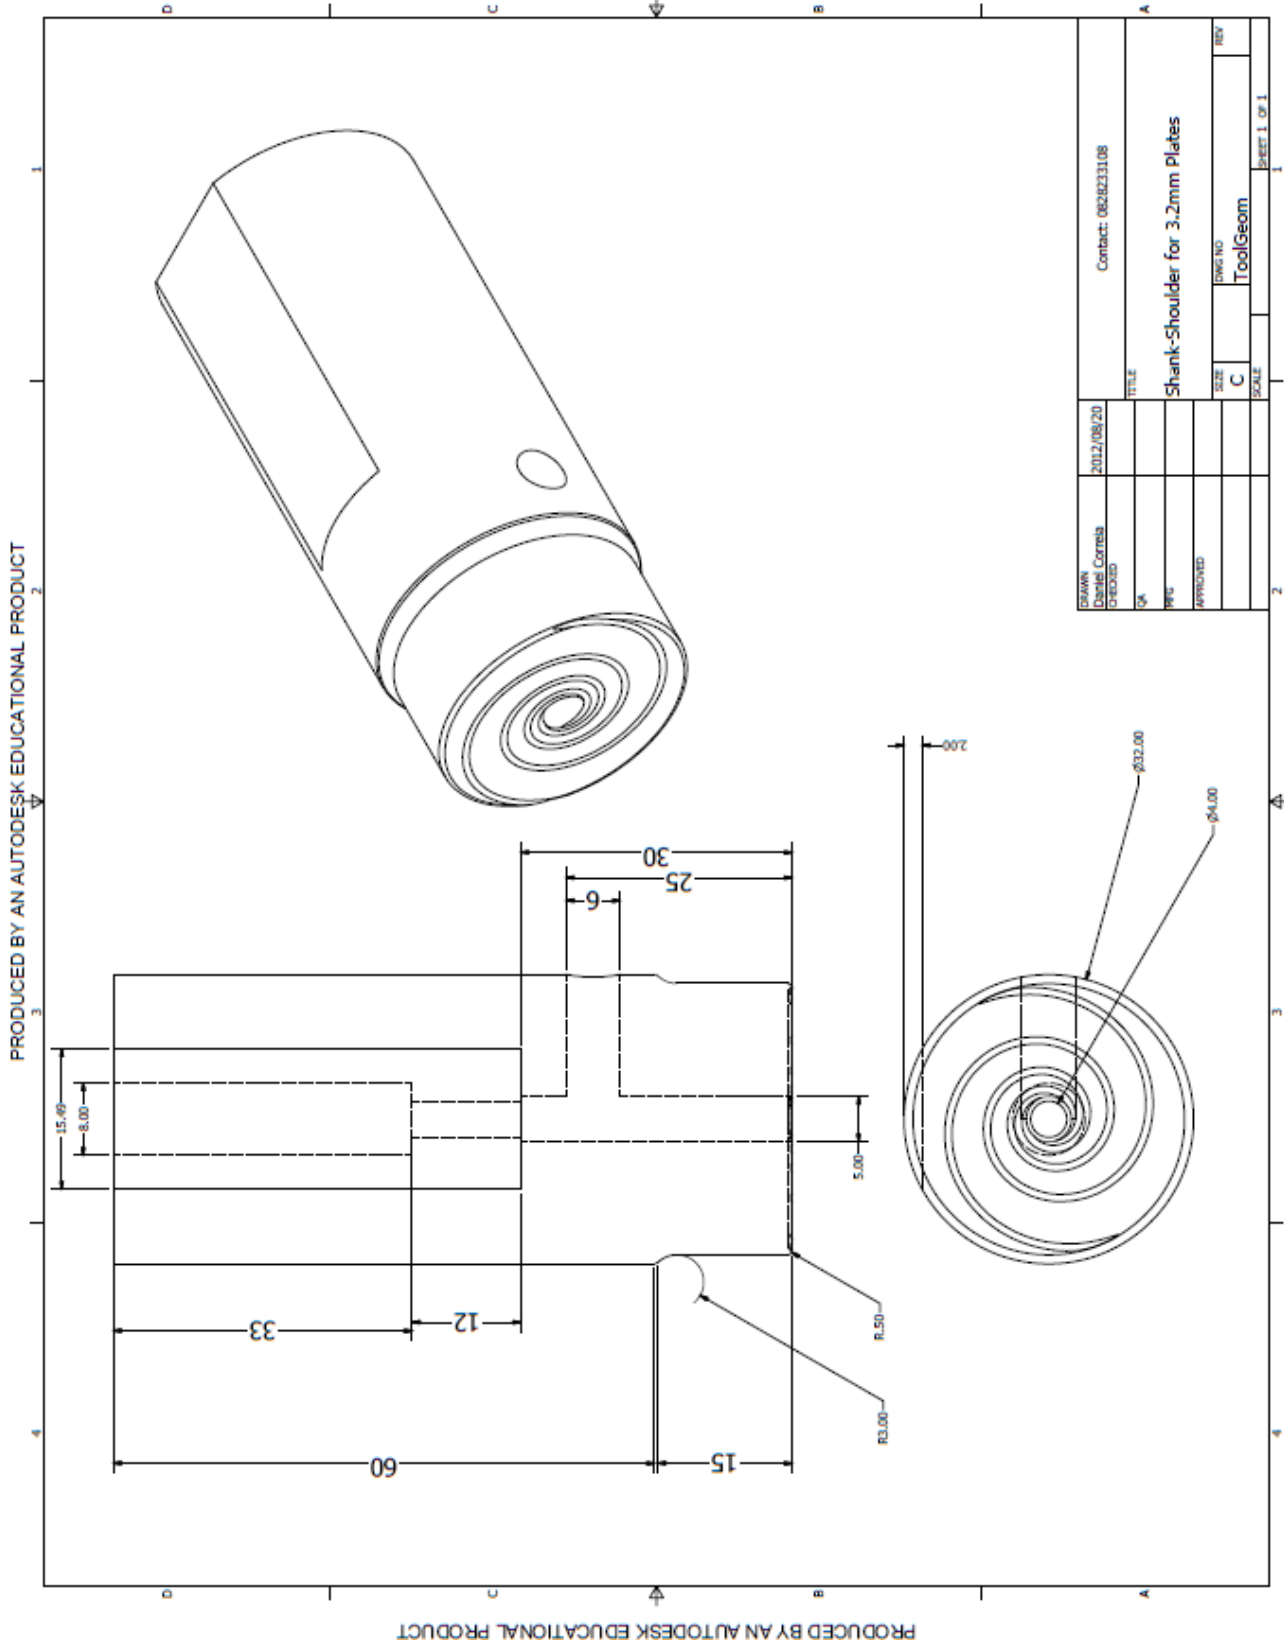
Engineering Drawing of Welding Shoulder
